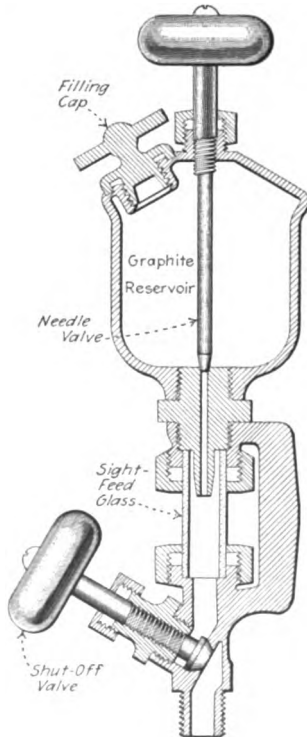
“Auxiliary” graphite feeder (Lunkenheimer Co.) for attachment to steam chest.
